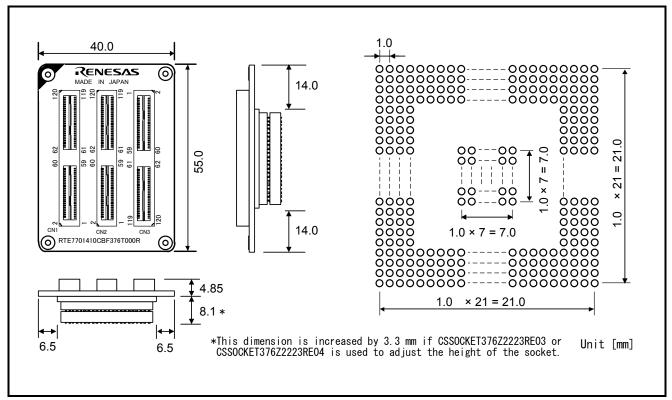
Drawing with Dimensions and a Pad Pattern for Reference
